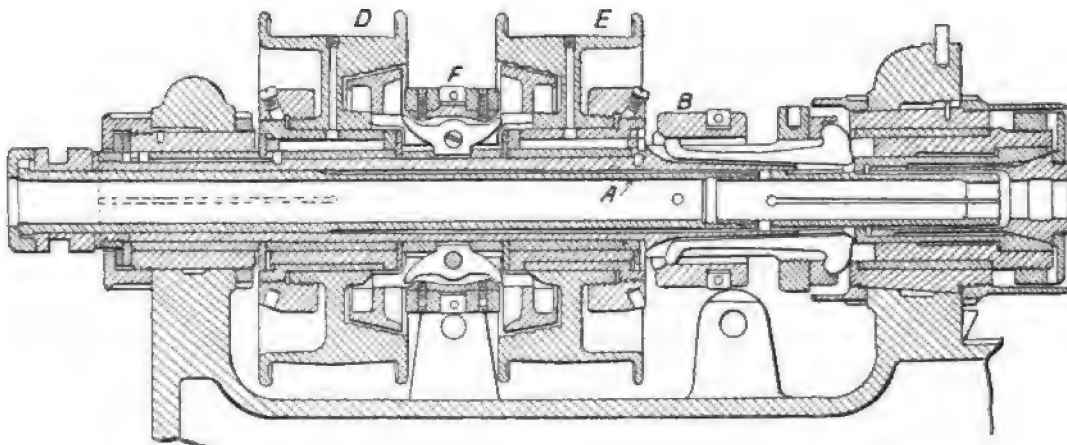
Section through Headstock and Spindle, Brown & Sharpe Automatic.
